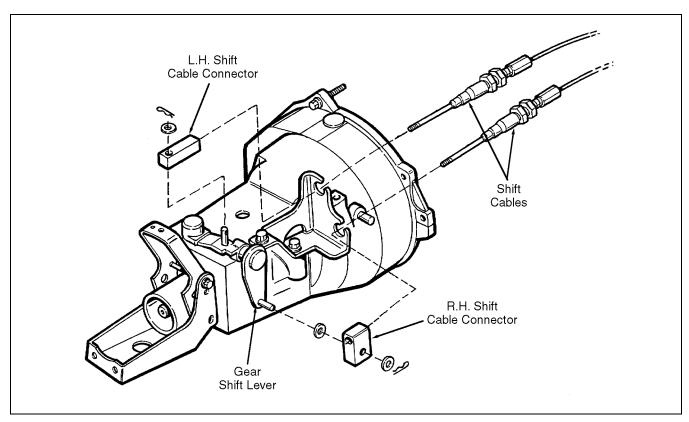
E-1. Gear Shift Cables/Connectors (3-Cylinder Gasoline Engine)
